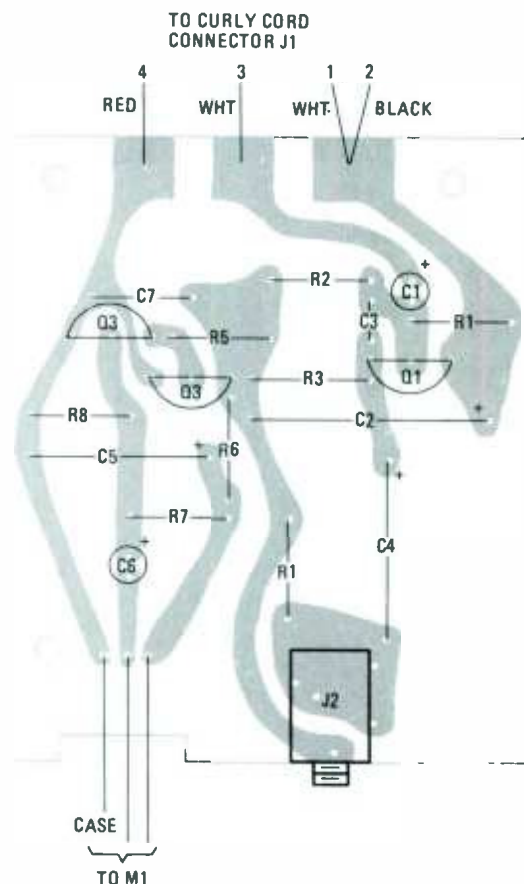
The parts for the project are shown here positioned on a drawing of an x-ray view of the printed-circuit board.
